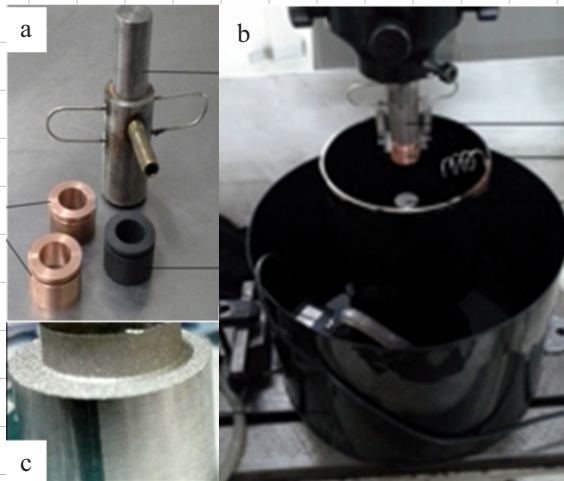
(a)Electrodes with holding fixture,(b) separate tank for machining with distilled water, and (c)sample obtained after machining which contained HS, VS and CS surfaces.
